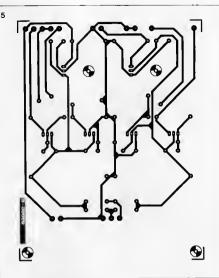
Track pattern and component layout for the power supply printed circuit board. IC1 and IC2 are fitted with small heat-sinks. Outputs A and 6 should be connected to the corresponding tarmnels on the bus board.
